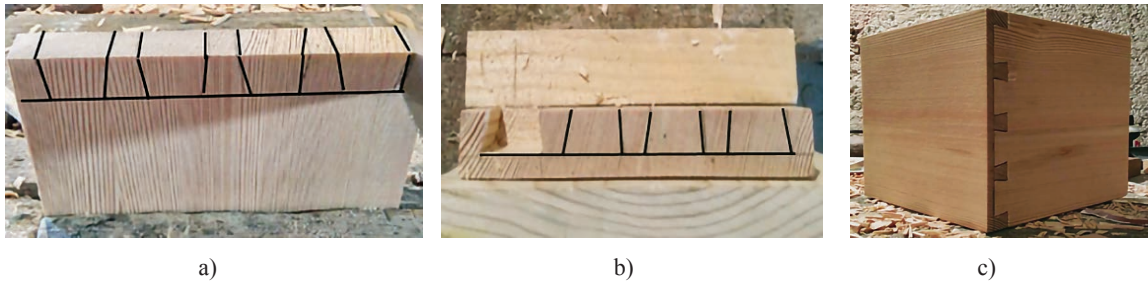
Crafting a semi-blind mitered dovetail: a) marking out, b) crafting, c) final joint
